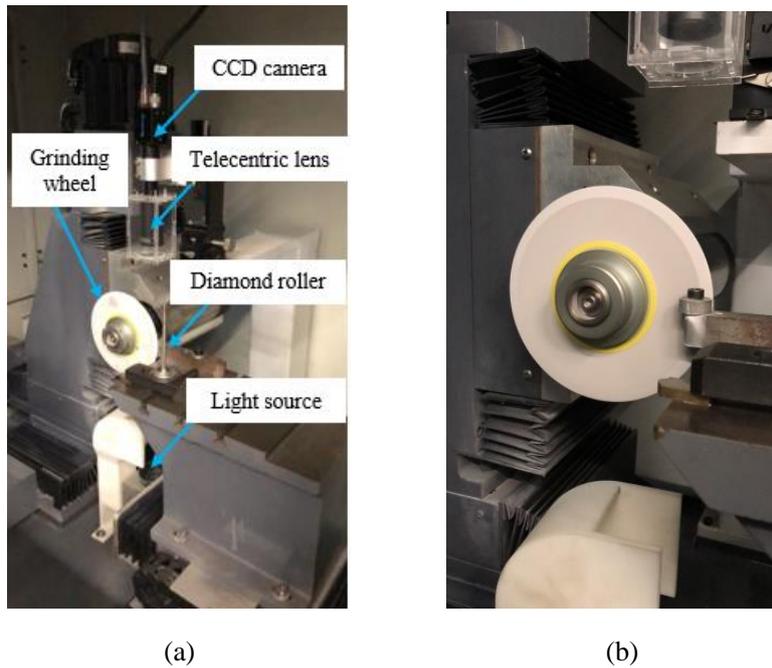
Experiment platform: (a)Self-developed profile grinding testbed; (b) Wheel and dresser in ressing.
